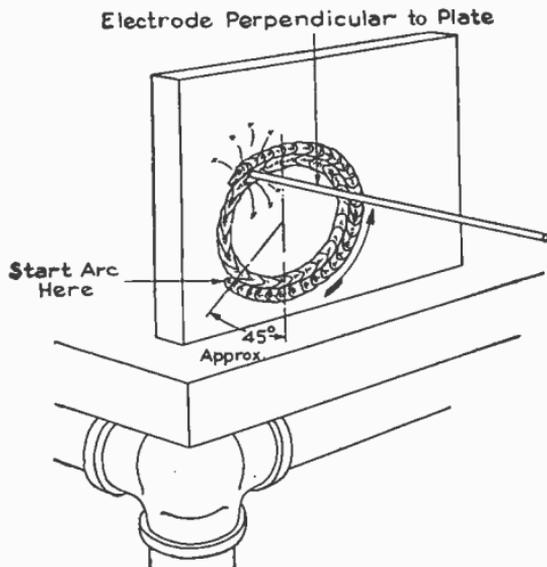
,101.—Lesson 14. *Welding around tubes.* The weld should be made continuously in one direction as shown, from start to finish. Particular attention should be given to obtaining a tight weld at the starting and finishing points, since such a weld under service conditions must be tight under high pressure.
